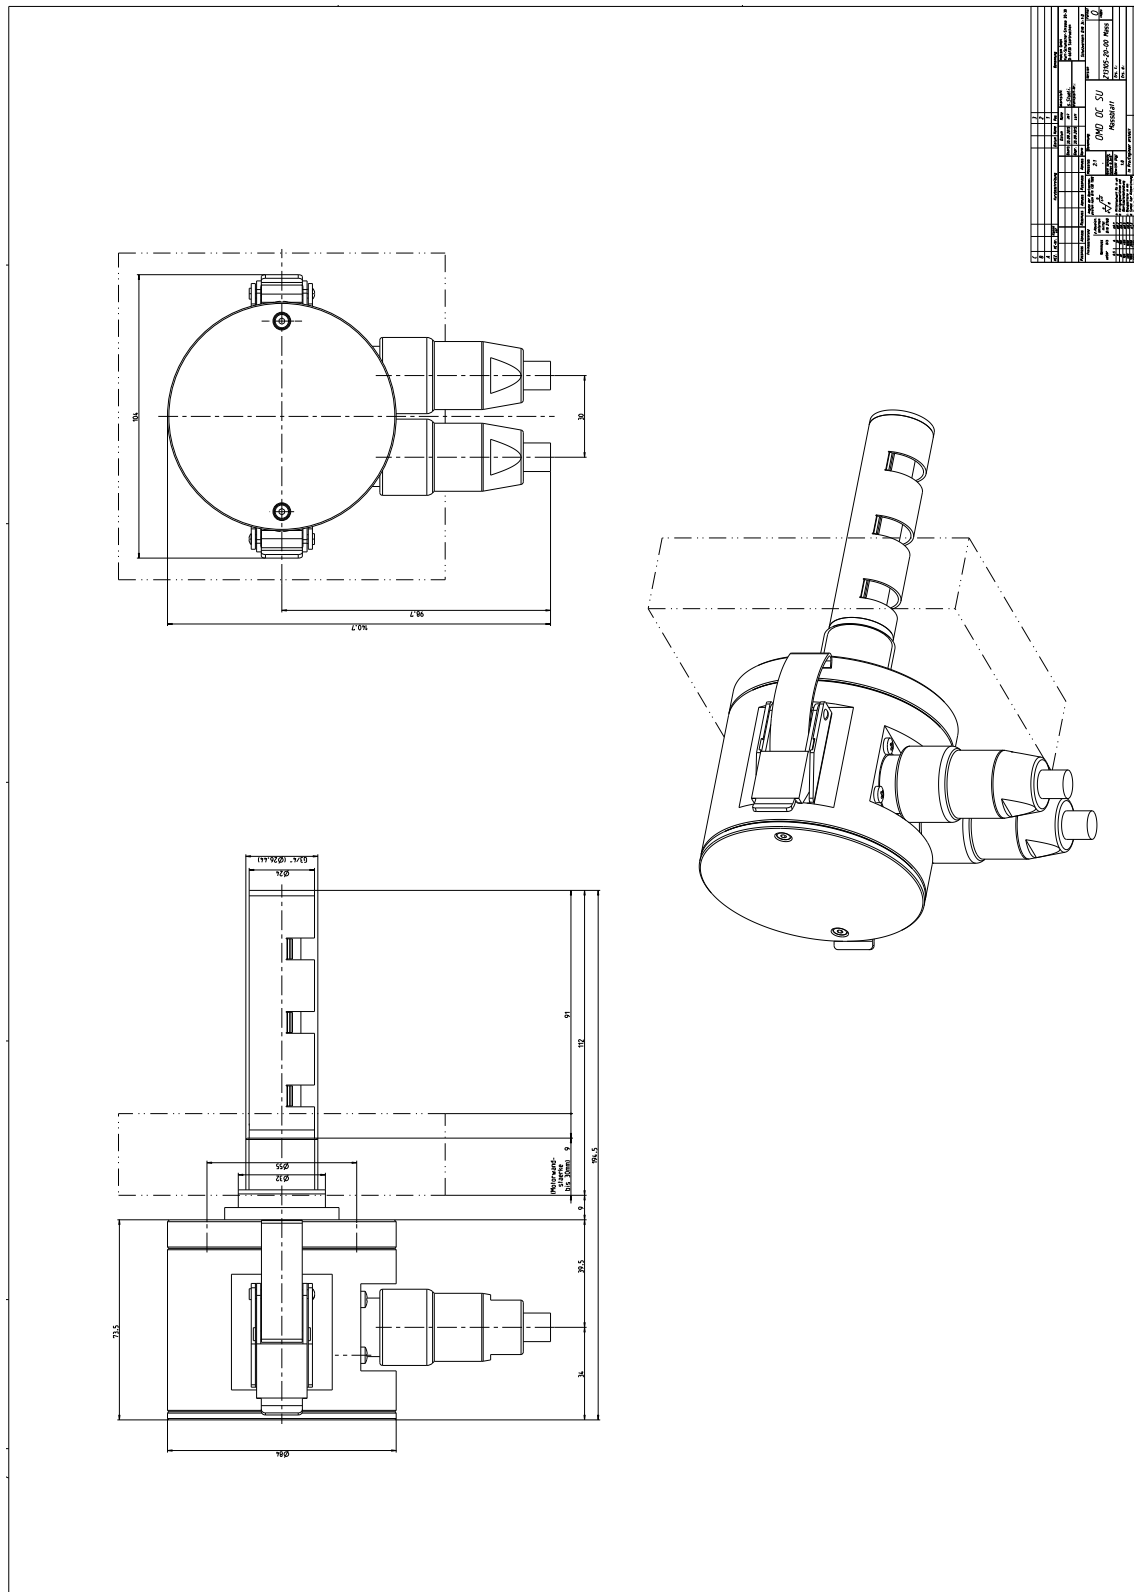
Dimensions SiCOMS® sensor Type SiSe OC 14-37
